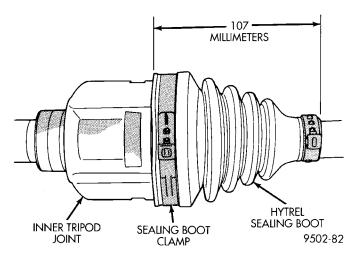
Sealing Boot End to End Length with Hytrel Boot
